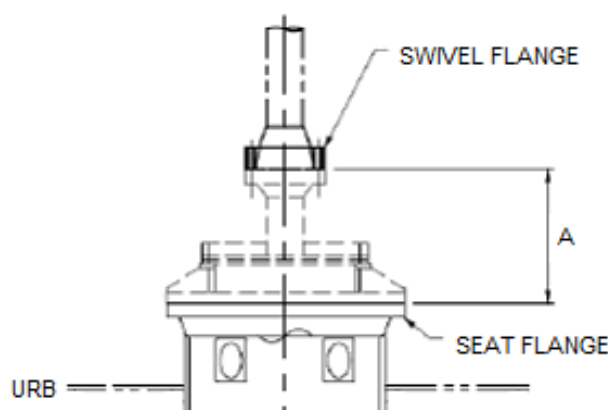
Hang-off detail of Flexible / Umbilical riser end fitting (Flange Elevation “A”).
